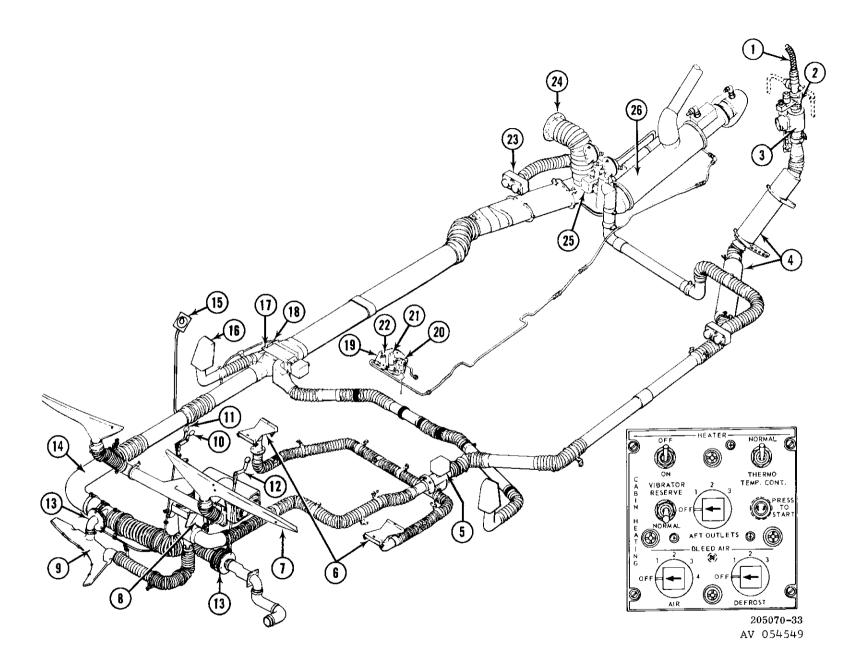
Heating and defrosting system (Sheet 1 of 2)
